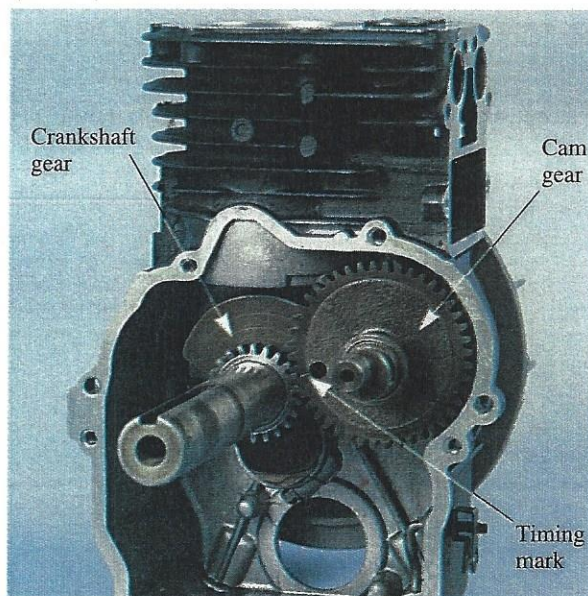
Camshaft is gear driven from crankshaft. Camshaft gear is always twice as large as crankshaft gear for proper timing. During assembly, timing marks must be matched.
